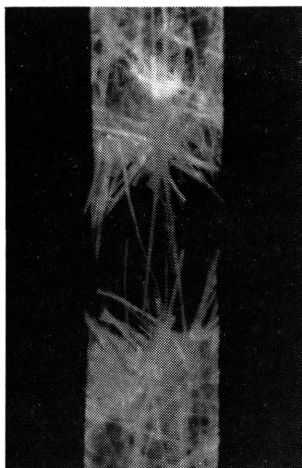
Fracture caused by tension of less than 5~7 kg/mm².
